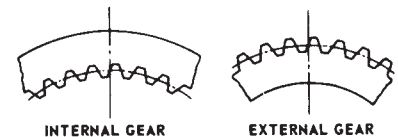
INTERNAL & EXTERNAL GEARS
